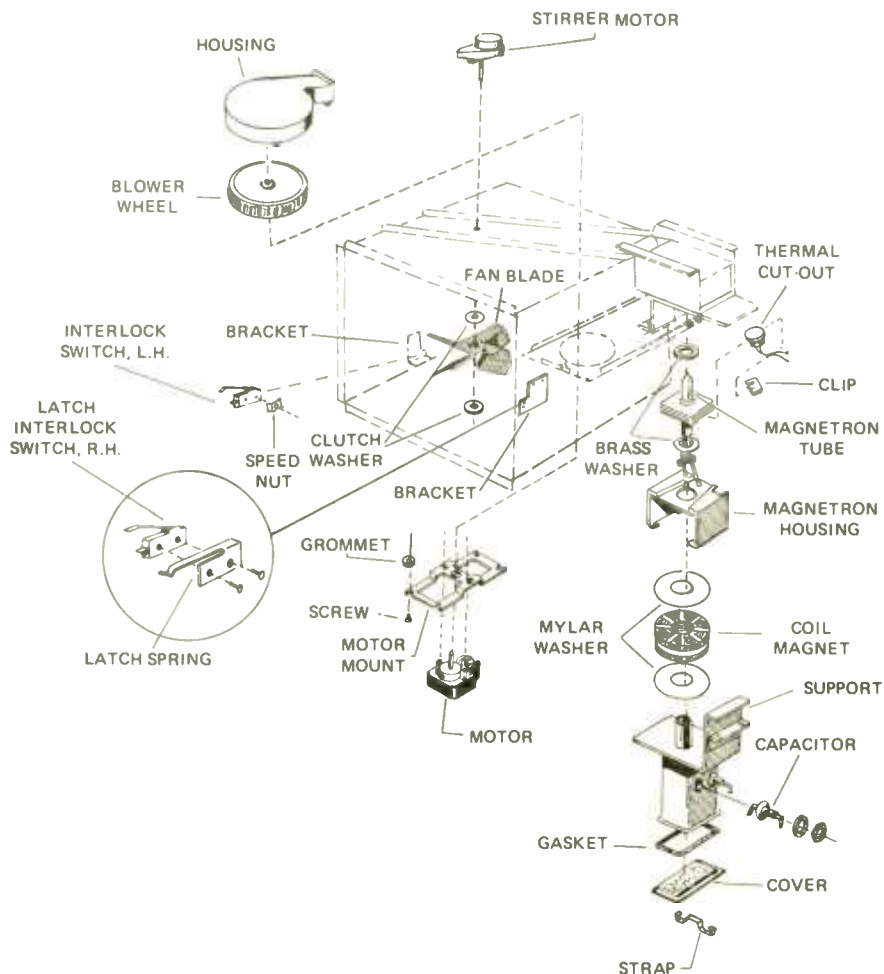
EXPLODED VIEW of typical microwave oven and magnetron assembly. You'll need this sort of information when removing a defective magnetron and installing a new one.
